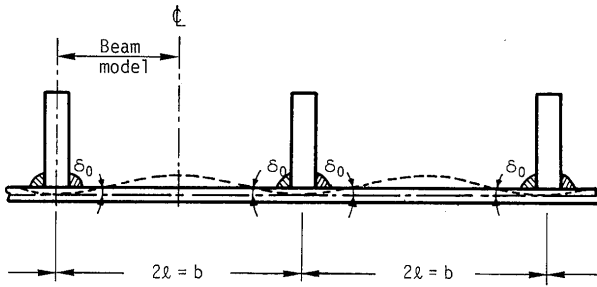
Deflection of panels due to fillet weld between panel and stiffener.
